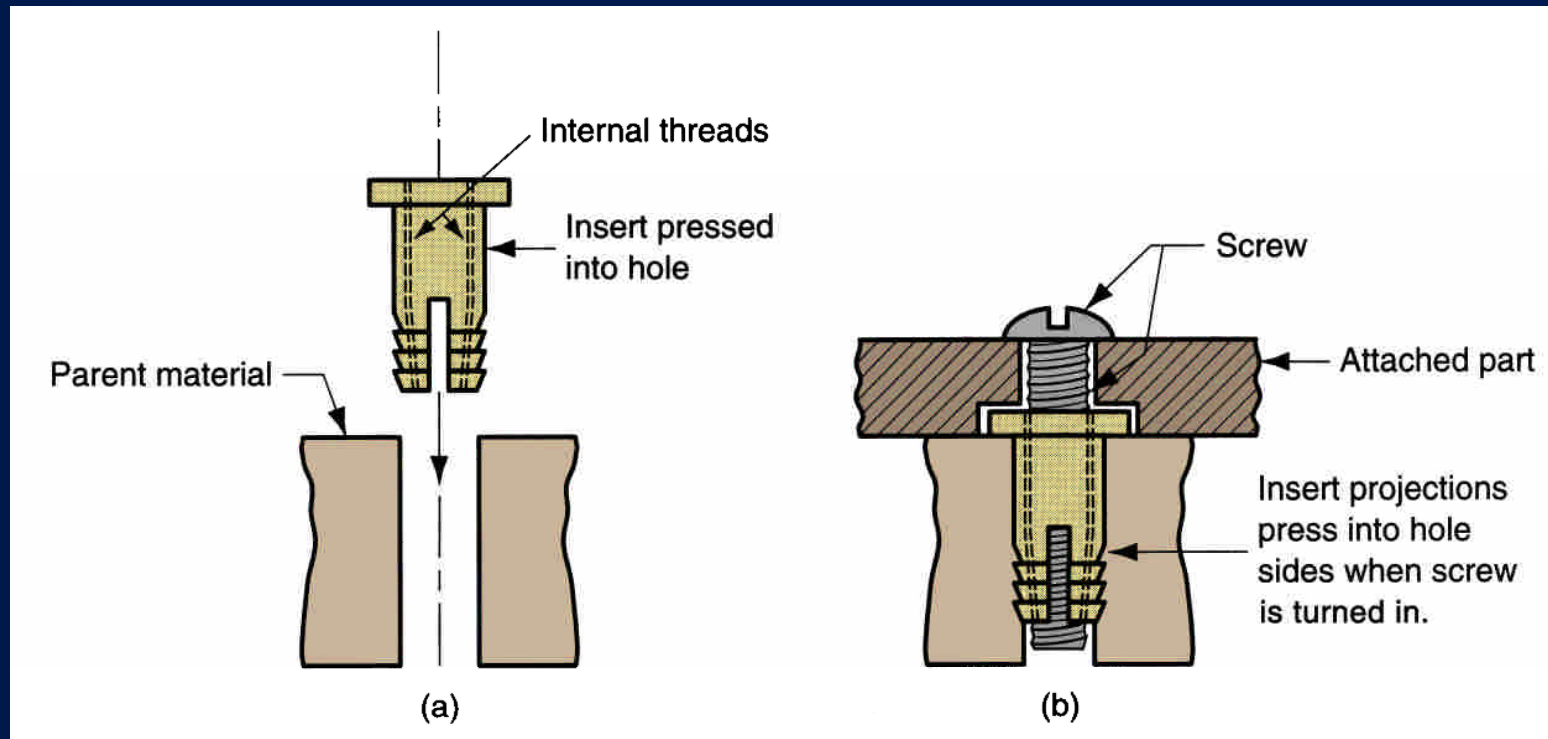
Screw thread inserts: (a) before insertion, and (b) after insertion into hole and screw is turned into insert
